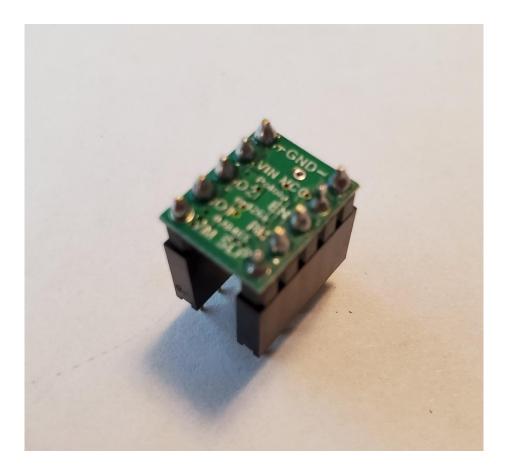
Preparing 5 Pin Female Headers for Soldering.
